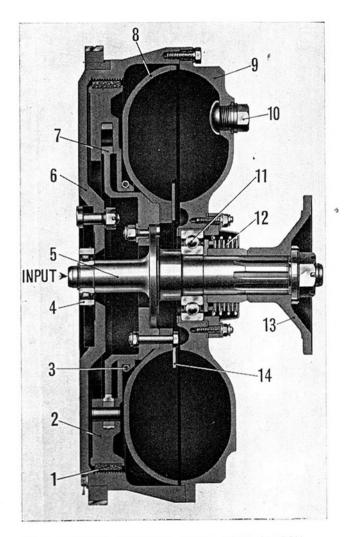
SECTION THROUGH THE 18" FLUID CLUTCH
